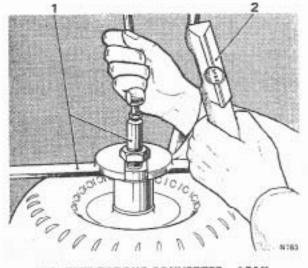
TORQUE CONVERTER – LEAK TESTING FIXTURE
